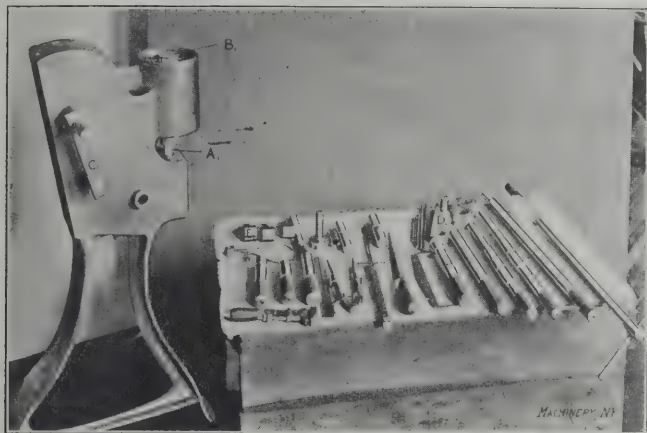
Tools used by the Inspector in testing the Work done on the Frames
